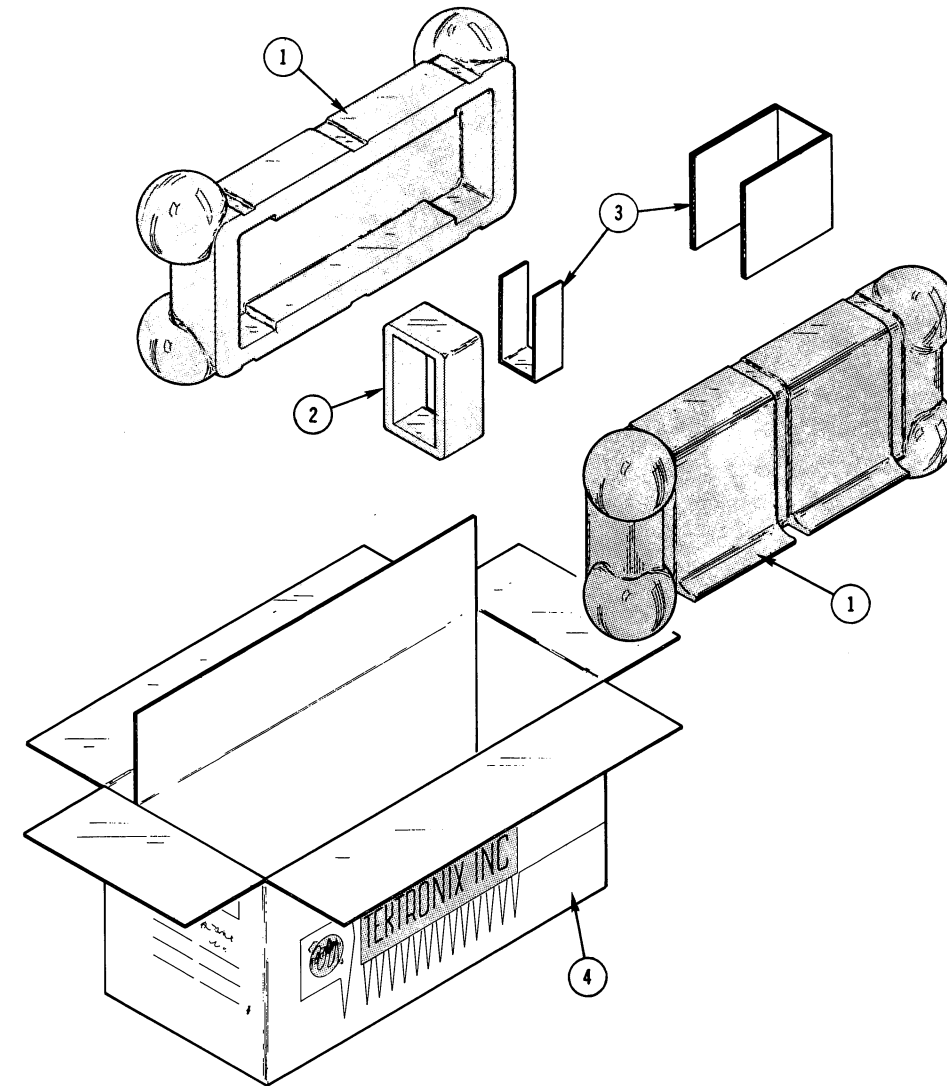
STANDARD ACCESSORIES & REPACKAGING
